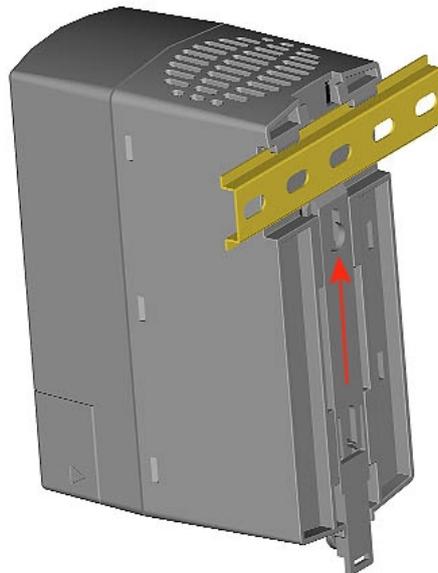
Attaching Top Part of Mounting Groove to a DIN Rail
